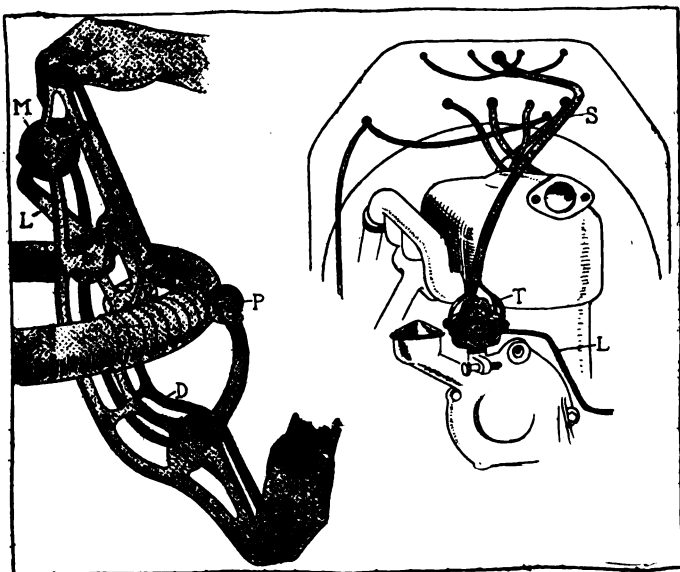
Rossman tire-wrapping machine. Fig. 2—Device for elevating the timer of Ford automobiles
